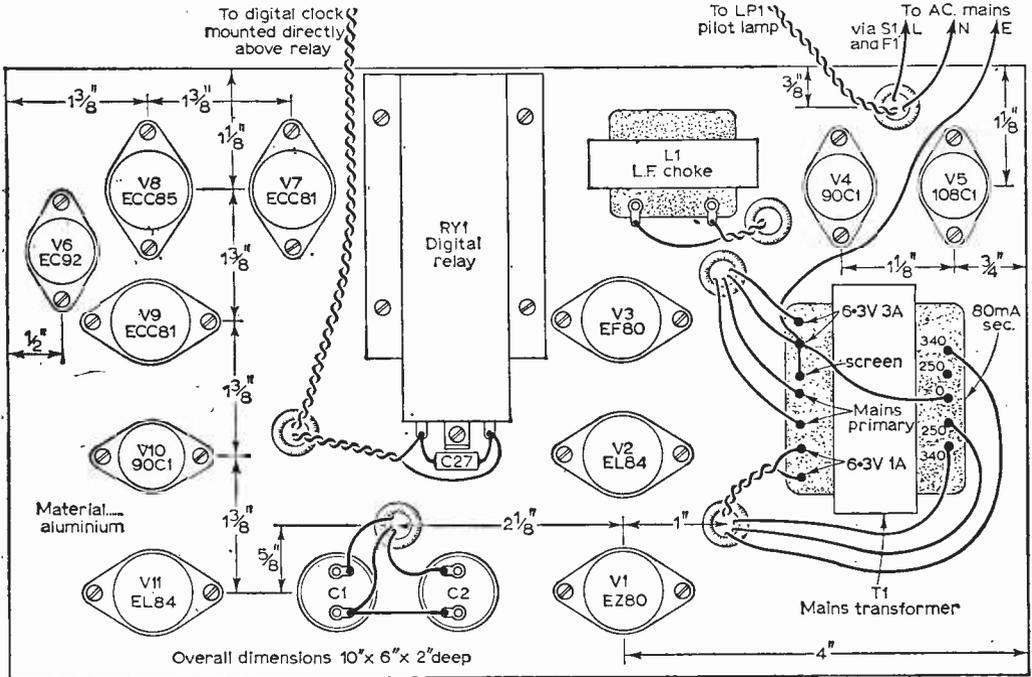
Above-chassis layout and wiring, showing main drilling dimensions.
